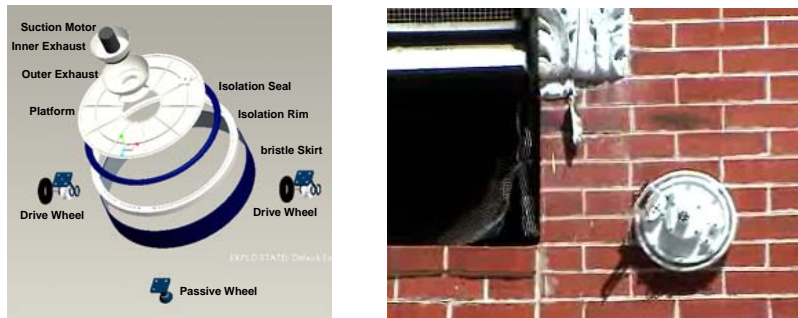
a) Exploded view of City-Climber prototype-I; b) City-Climber prototype-I approaching a window on real brick wall, a CMU-camera is installed on a pan-tilt structure for inspection purposes
